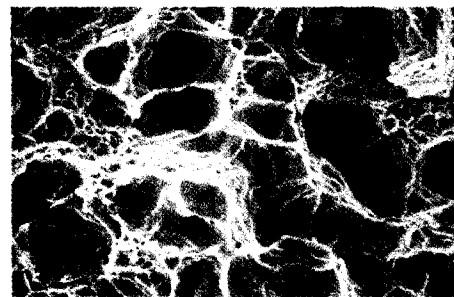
Fractured surface of the weld in Fig. 10 at higher magnification (x2,000).
